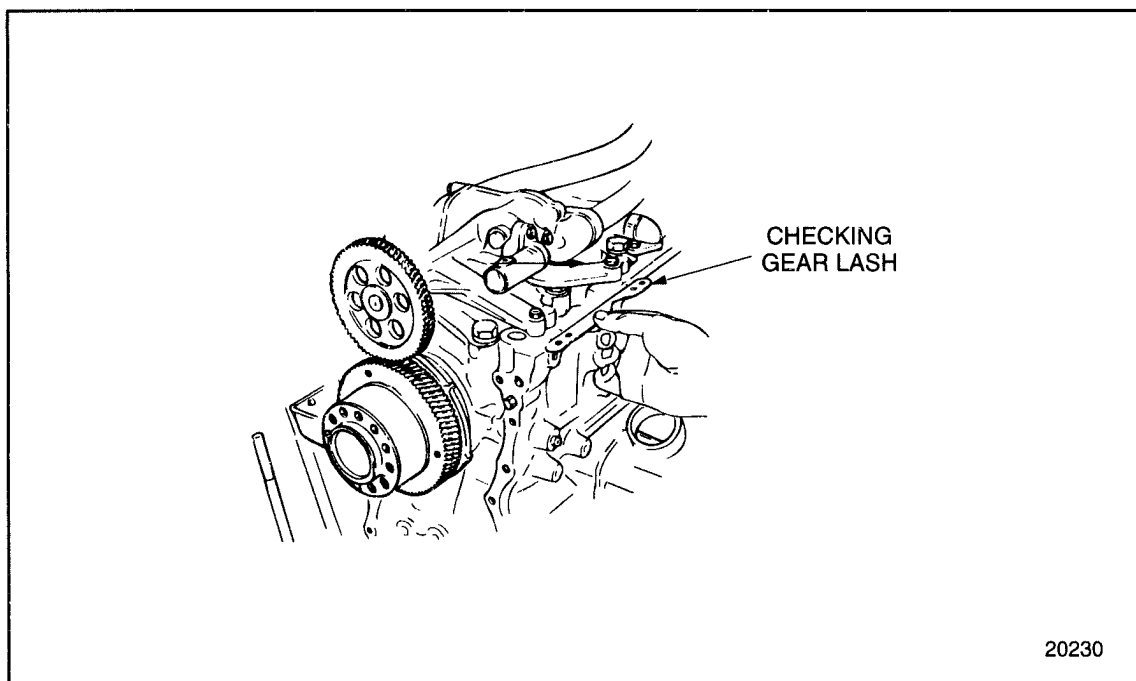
Lubricating Oil Pump Shim Installation
